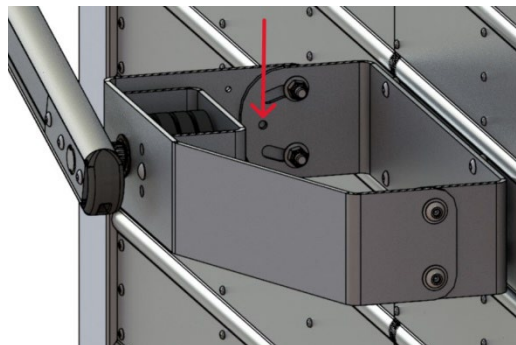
Hole location for final $3/8$ " bolts and nuts.
